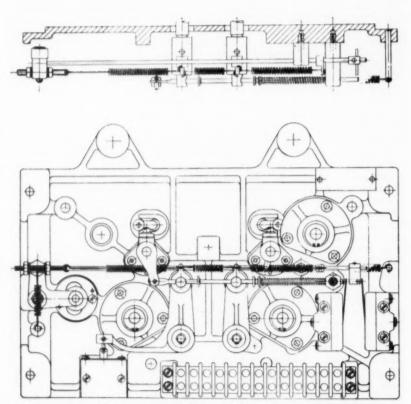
PR-42 Film-Drive Mechanism with motor and flywheels removed.
